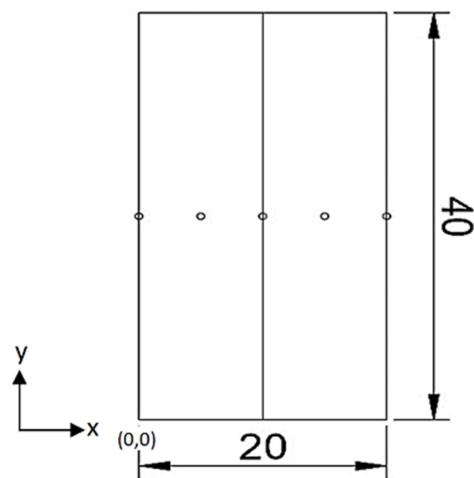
Boundary temperature probe points perpendicular to weld line (x-axis).
